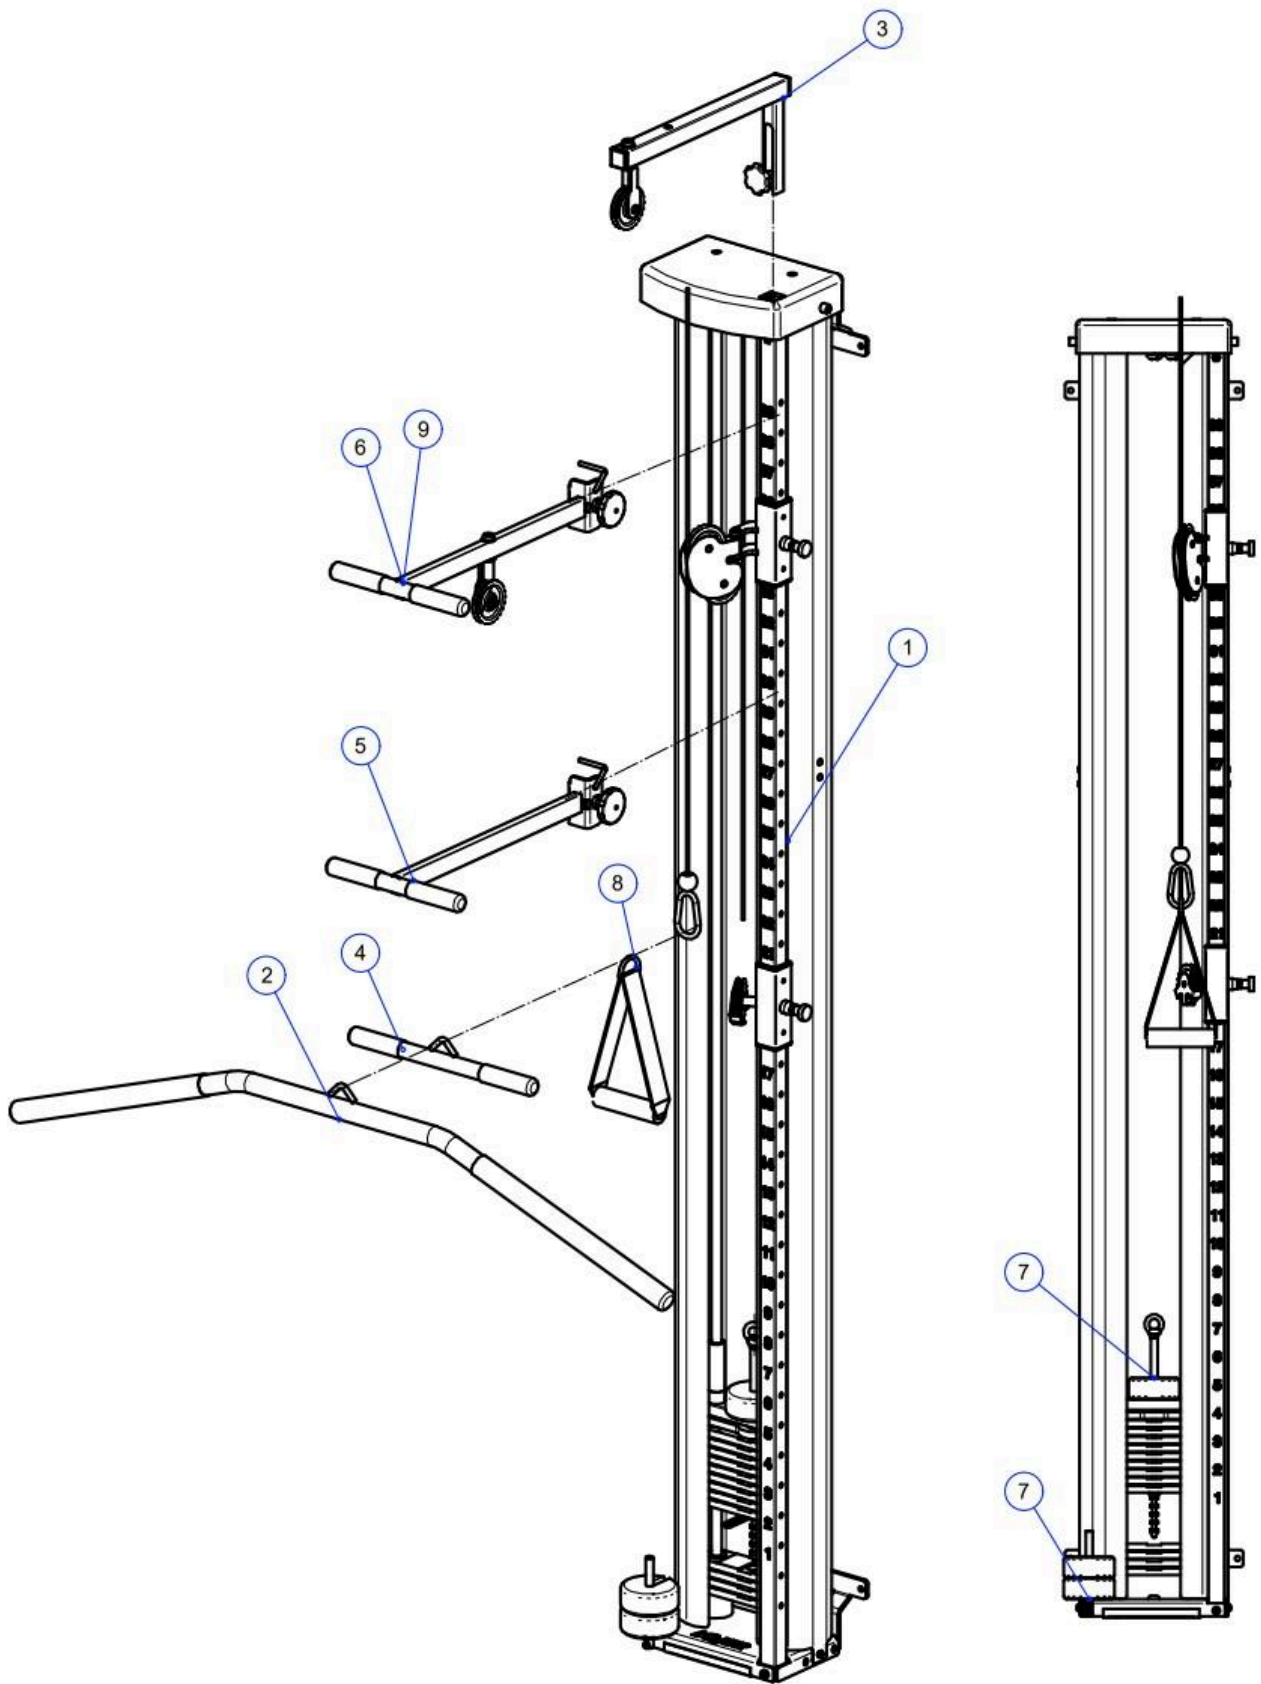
14KG PULLEY OKP AND ASSEMBLY MODEL
